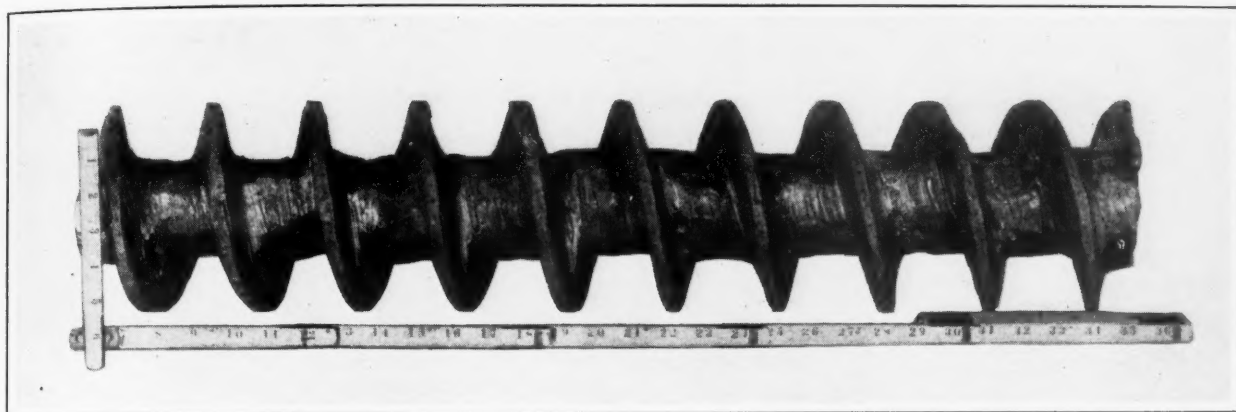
Screw Cut from Solid Machine-steel Bar by Oxy-Acetylene Torch
